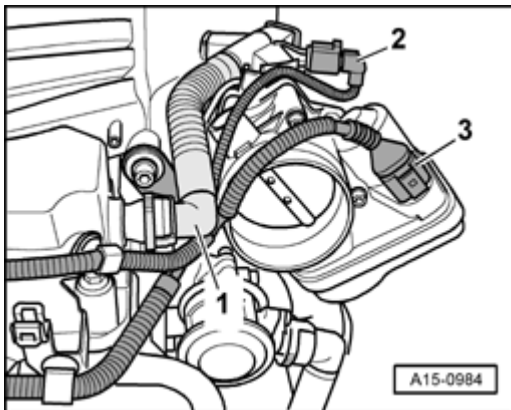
Disconnecting Crankcase Breather Hose & Electrical Connectors
